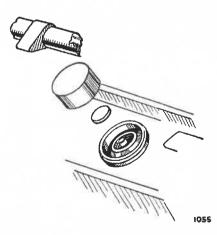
The pad for adjustment of the valve clearance is situated between the tappet and the top of the valve stem.
